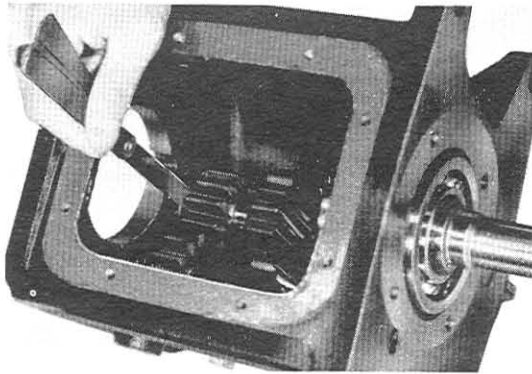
Measuring Counter V0463 Drive Gear Thrust Clearance
